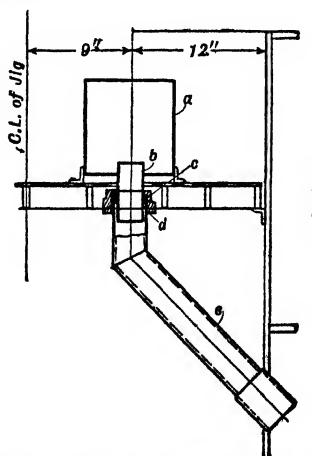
Cup-and-pipe draw for Bendelari jig.
